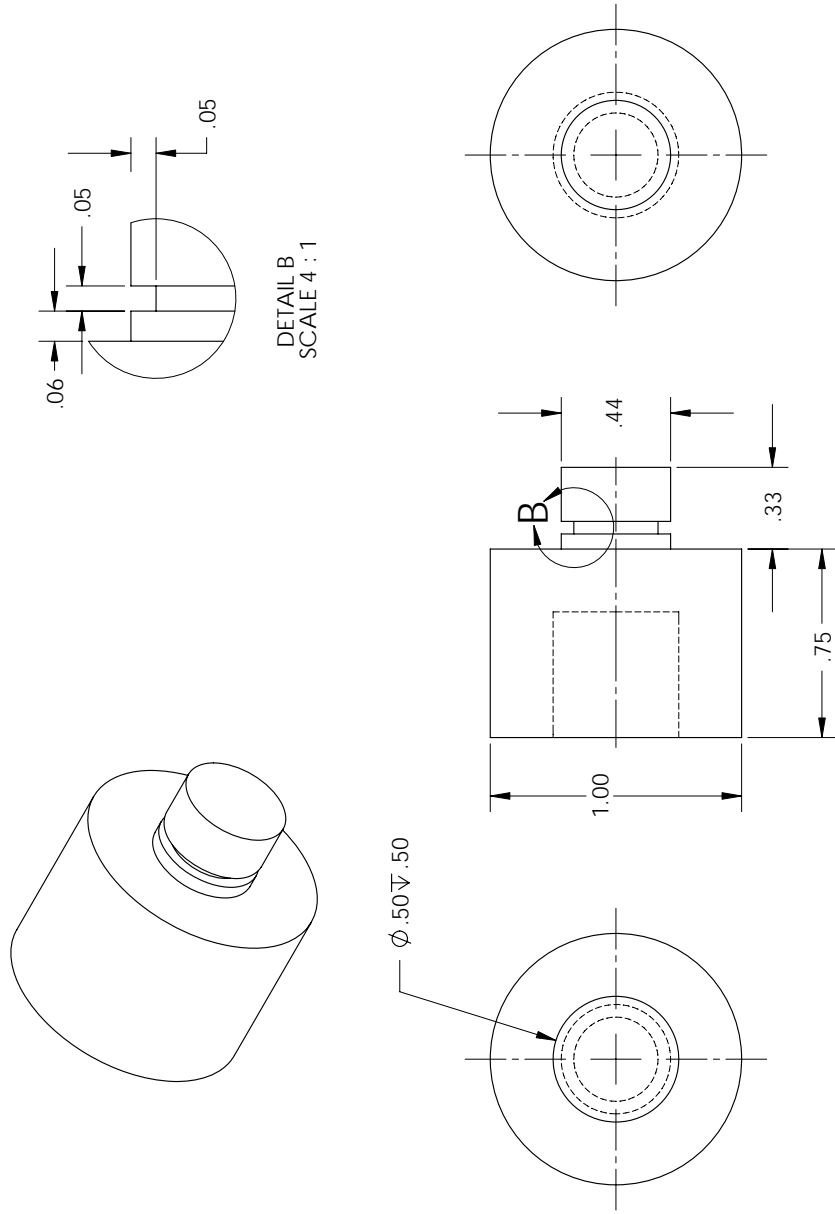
Engineering drawing of the drogue connector which mates the drogue to the acoustic section at the quick disconnect connector without engaging the valve.
